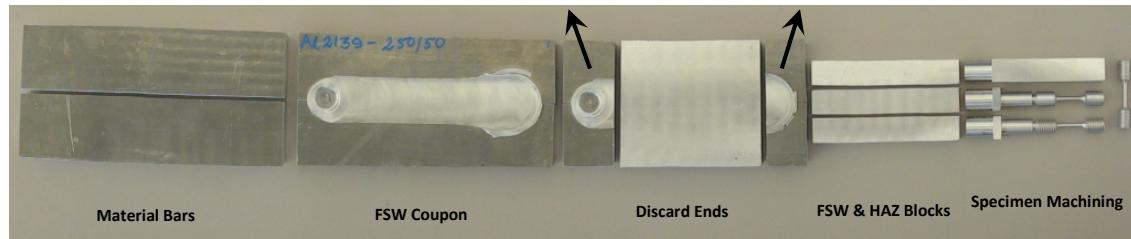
Specimen Manufacturing - Material Stock Thru Final Machining
